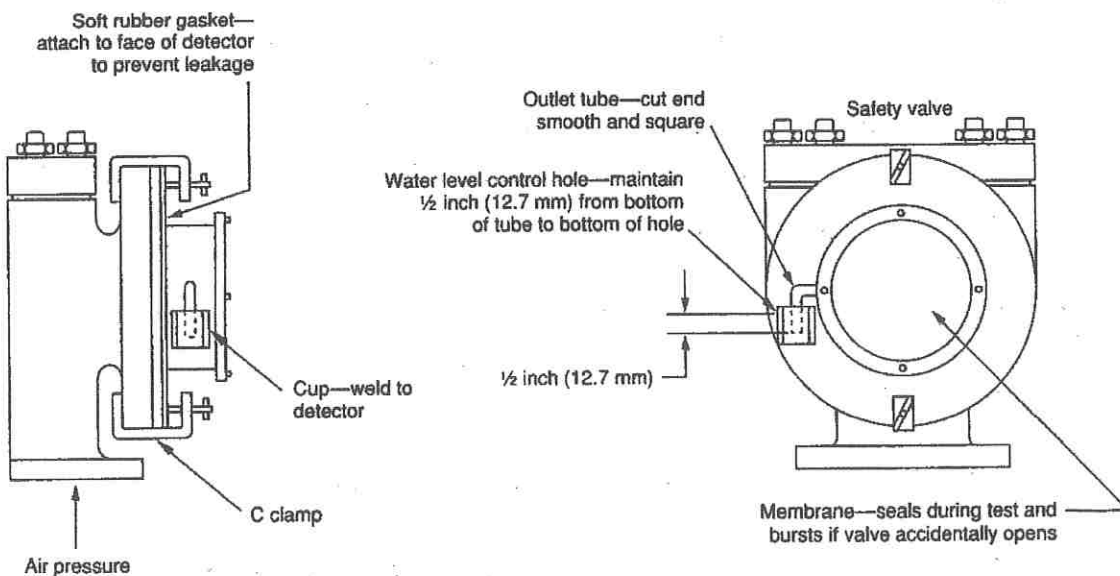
Device to Relieve Body Pressure Caused by Accidental Popping of the Valve
